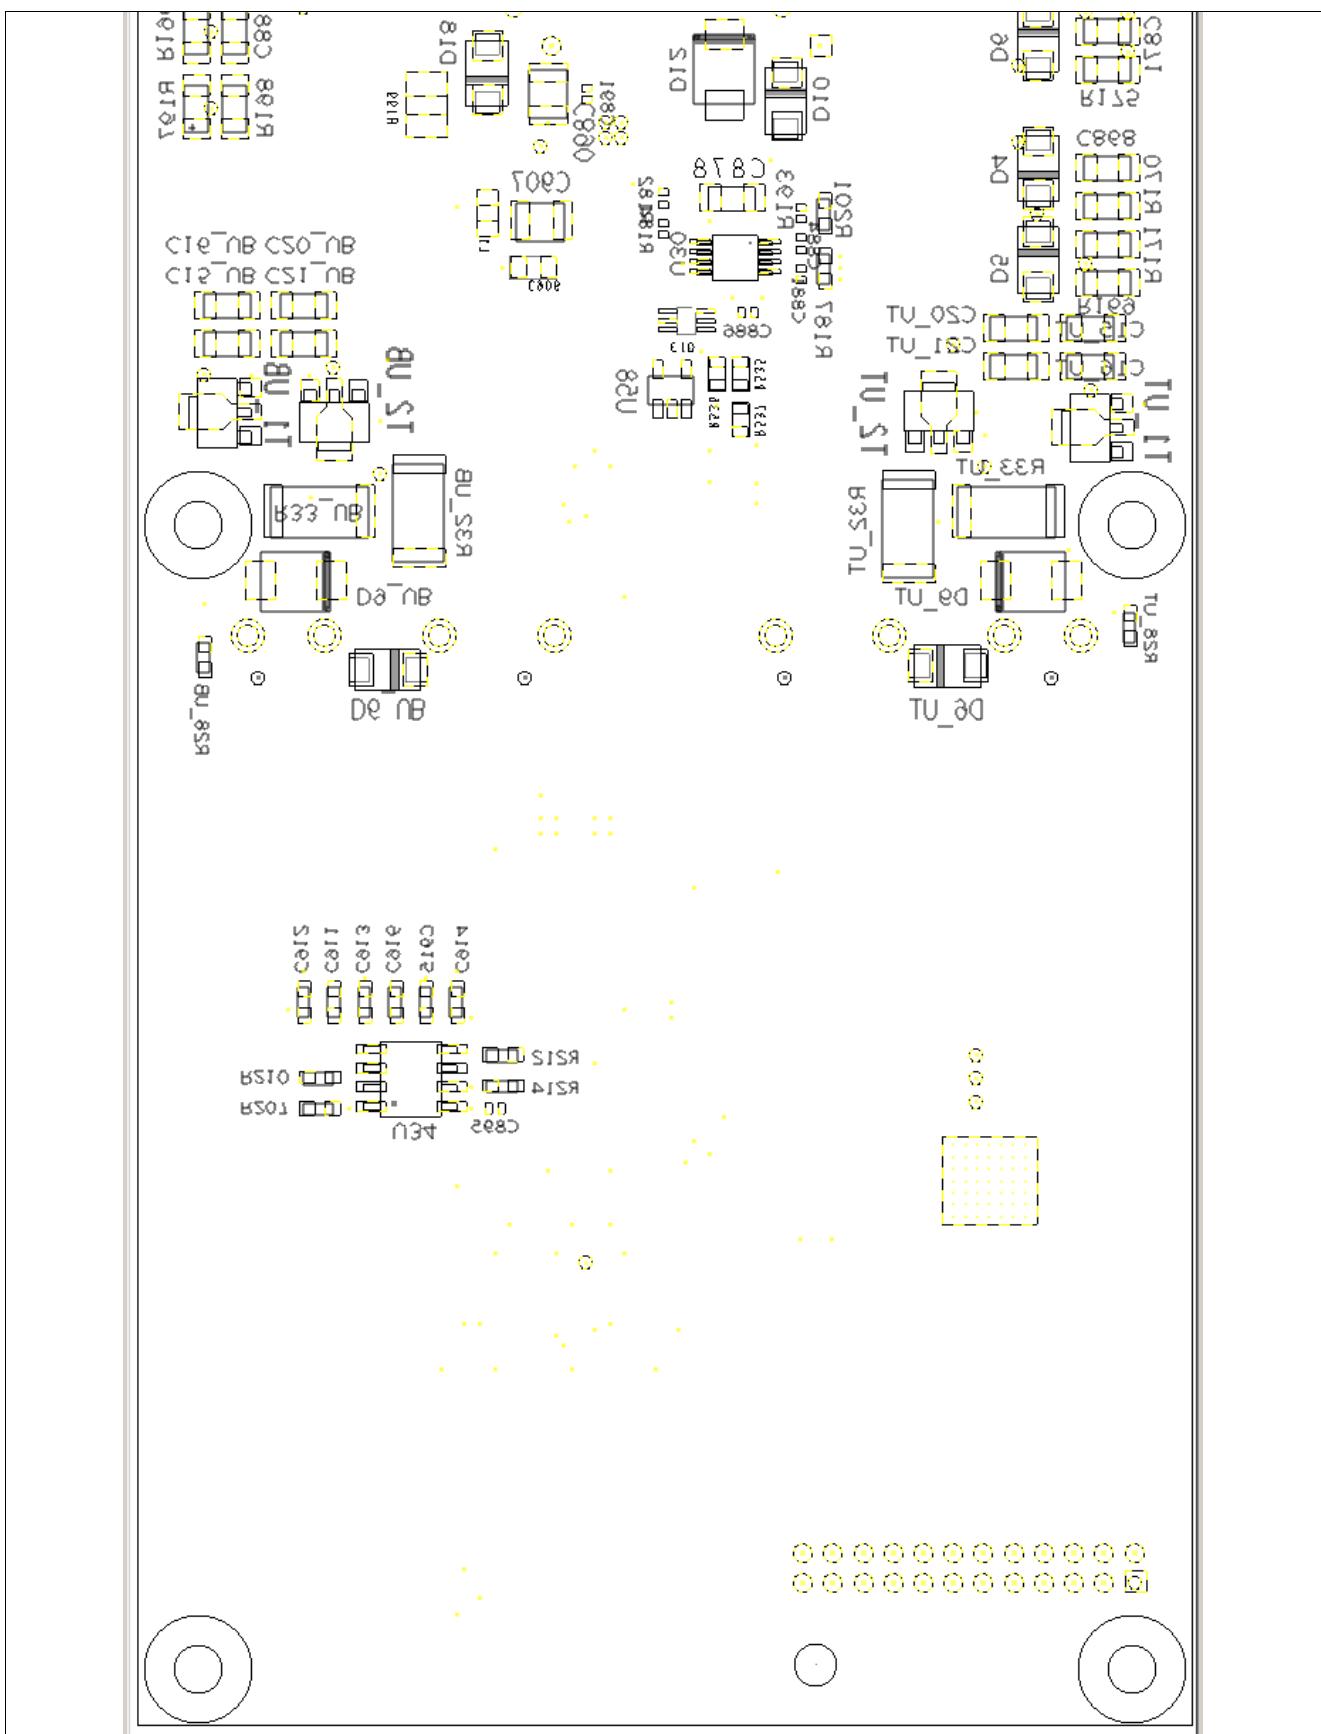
Assembly Drawing of the Driver Board (Bottom) - part 2
